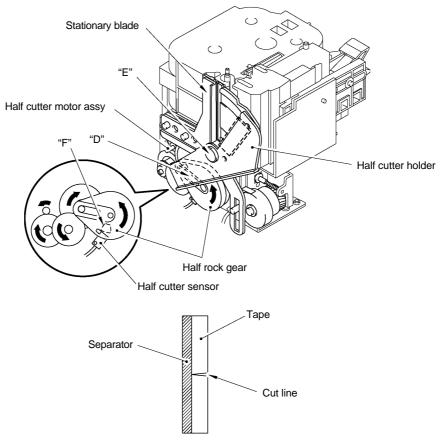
Tape Automatic Half Cutter Mechanism
